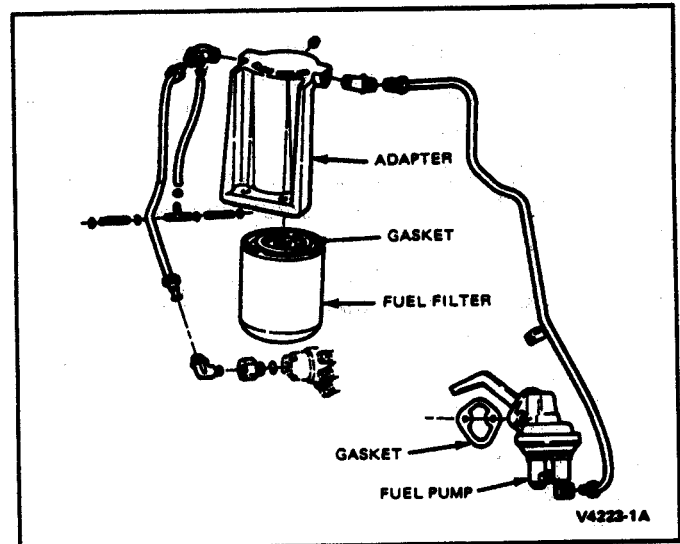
Fuel Filter, Injection Pump and Lines—Exploded View
